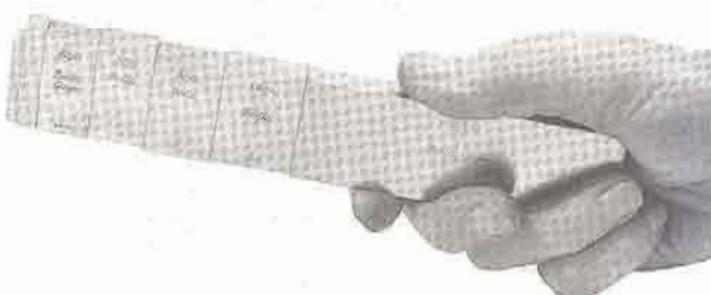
Seven gage blocks wrung together to build up a desired dimension. (Courtesy of DoALL Company.)
